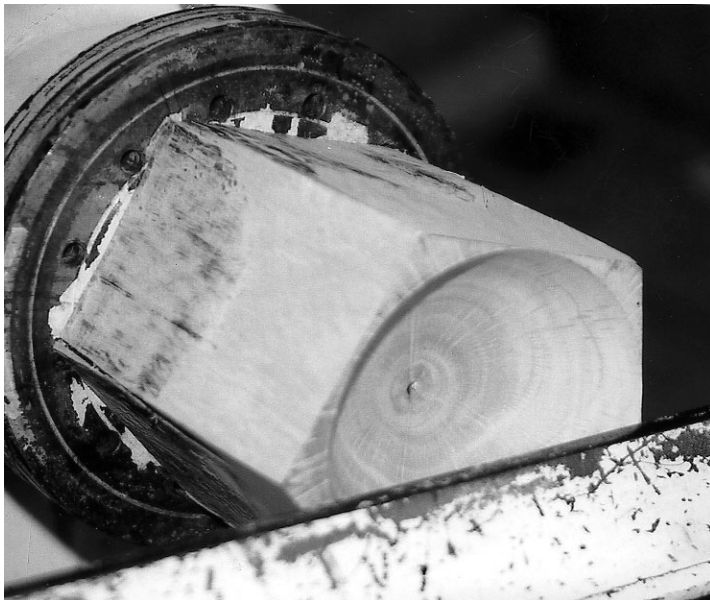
Block mounted on faceplate and hollowed out to near the edges.
